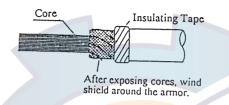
Fabricating cable 00-8016-038-313-761HV
